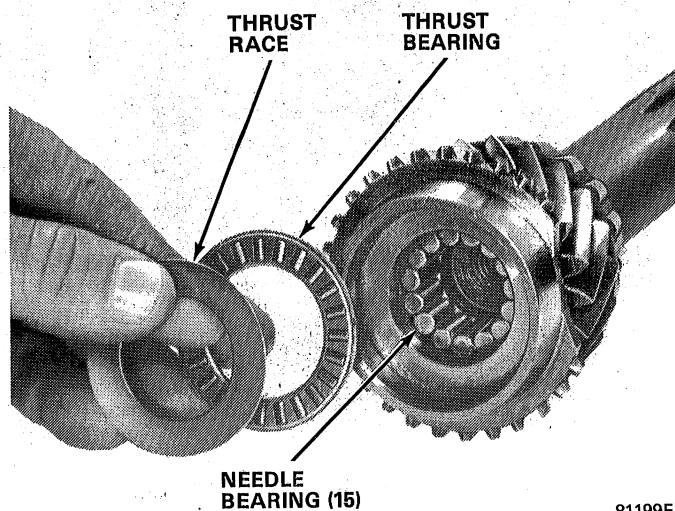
B-14 Clutch Shaft Roller Bearing, Thrust Bearing and Race Removal/Installation
